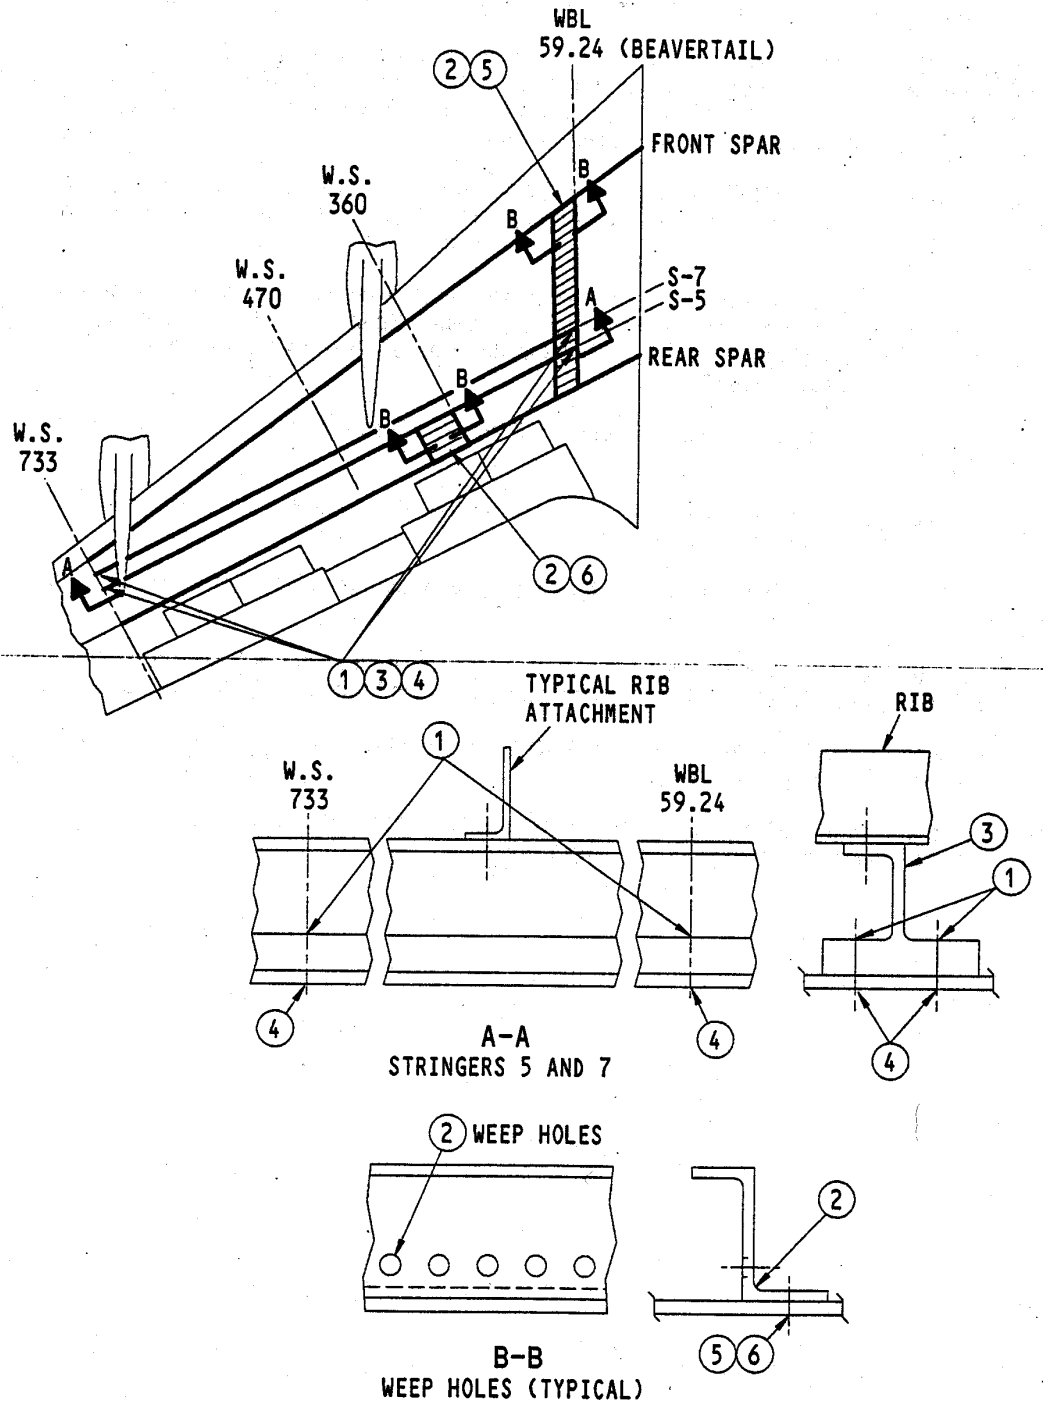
707 SERIES INSPECTIONS OF WING LOWER SKIN AND STRINGERS
